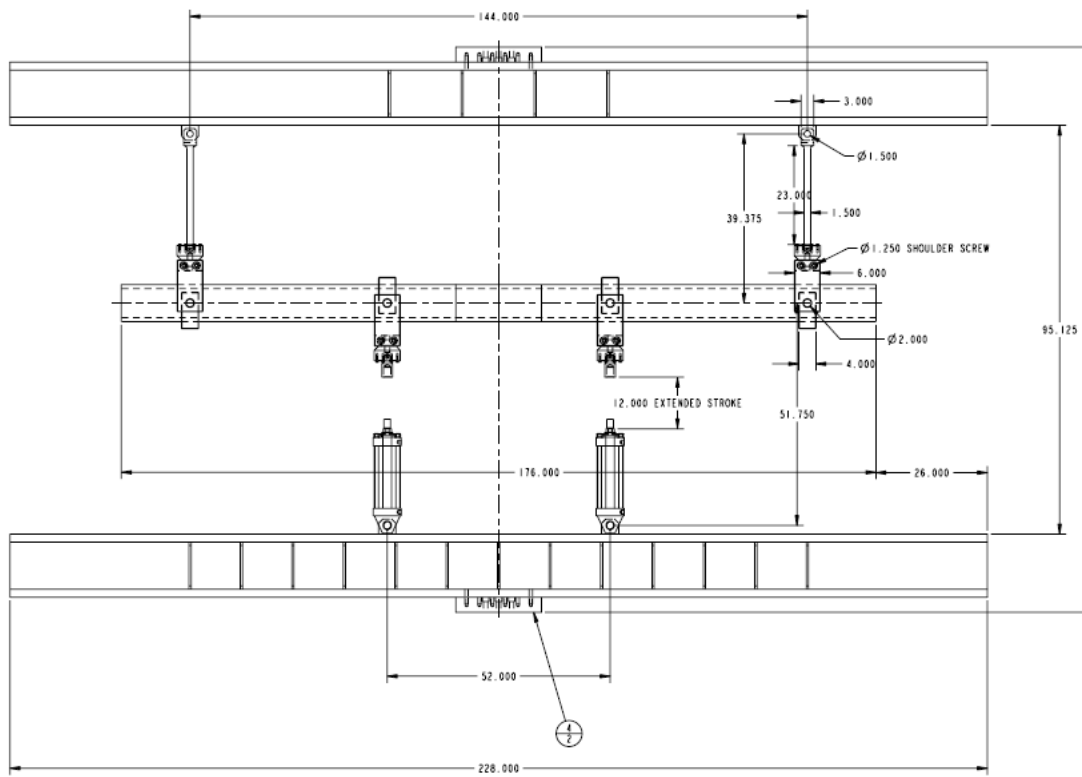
Strongback and saddle design to be used in DMW pipe fracture experiments (picture provided by Battelle). Full size photo in Appendix D.
